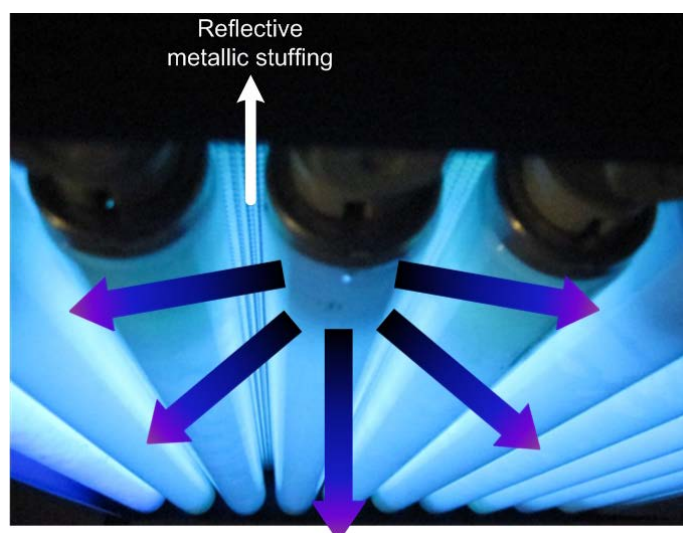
Illustration of how the UV light is transmitted by the array of lamps in the PCB exposure machine.
